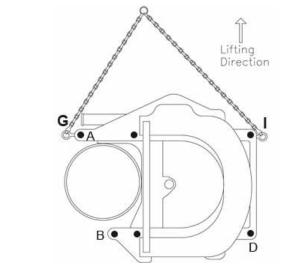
Use eyebolt locations G and I to mount the saw on the side of a horizontal pipe.
